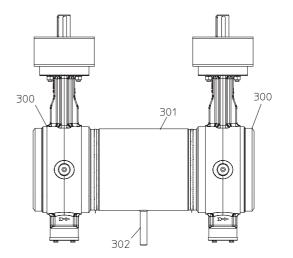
Process valve ZETRIX[®]-DBB Butt weld connection 019-DBB
